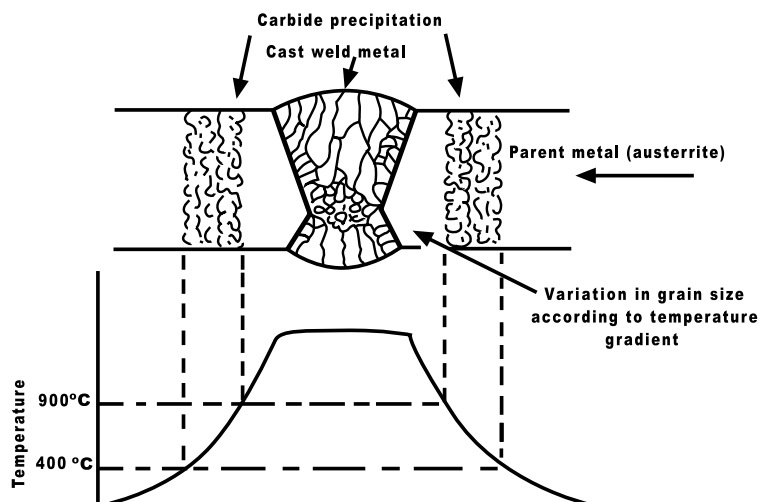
Typical welding structure of Austenitic Stainless Steels
